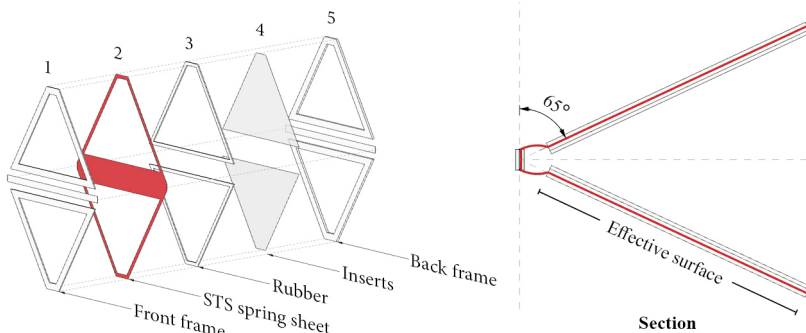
Elastomeric layered panel with Spring metal sheet exploded drawing & section
